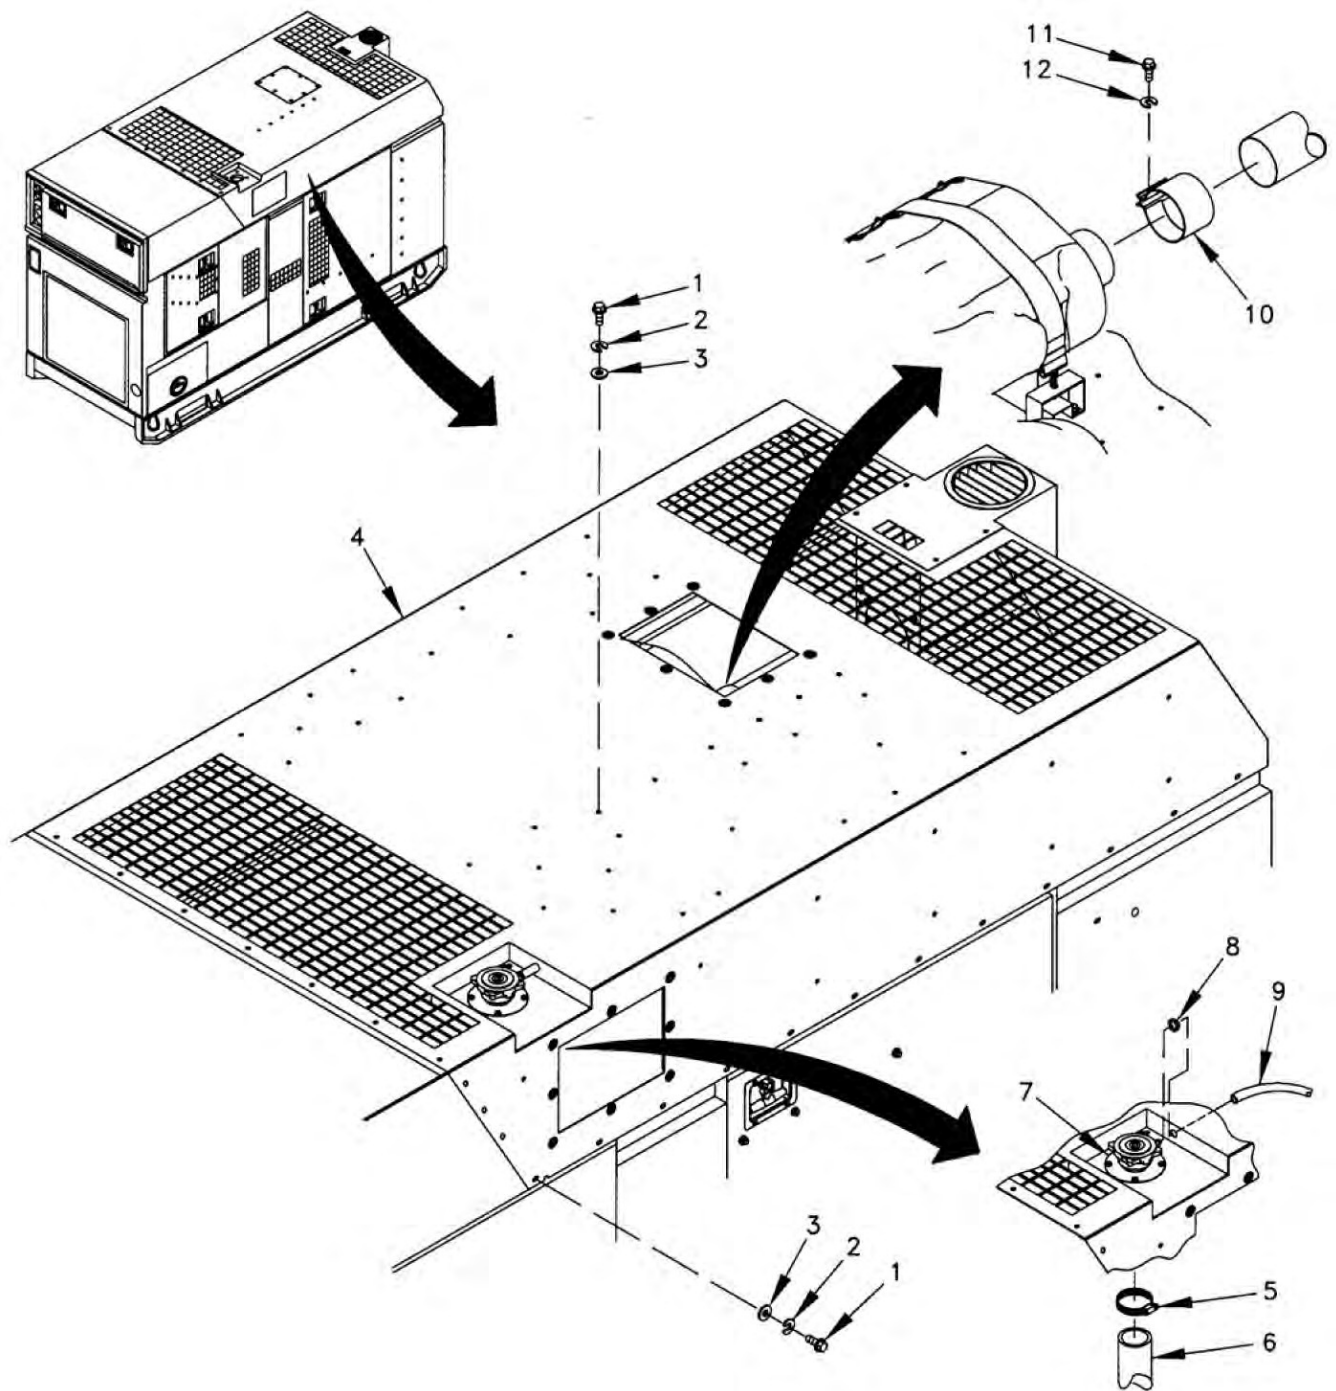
Front Roof Section Housing Assembly (Sheet 1 of 2).
